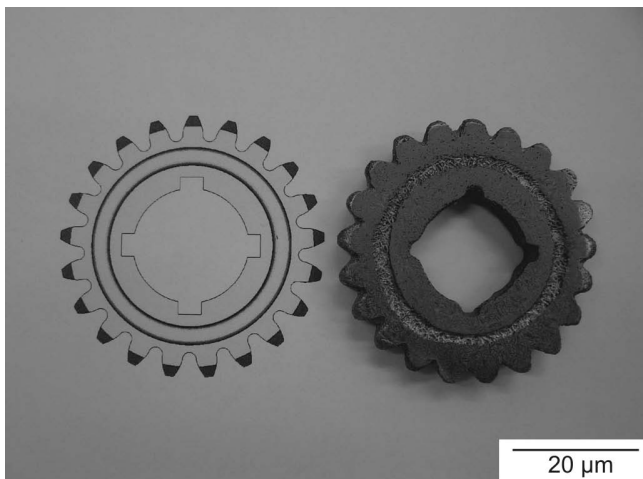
The CAD model of a gearwheel (left) and the corresponding printed part after RMI³⁸.
